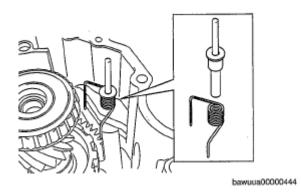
Identifying Pawl Return Spring And Parking Pawl Shaft Courtesy of MAZDA MOTORS CORP.
